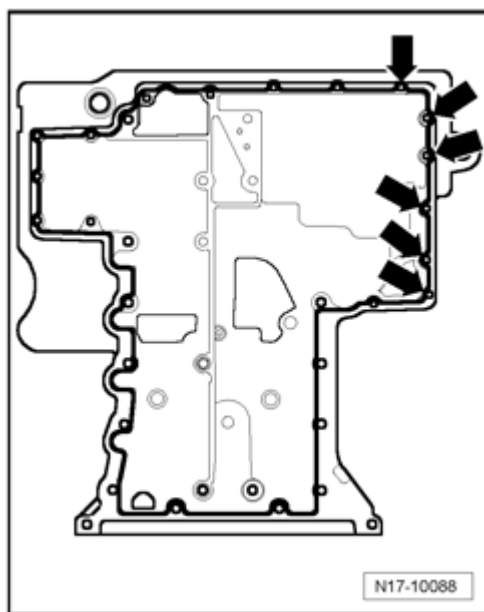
Applying Silicone Sealant To Clean Sealing Surfaces Of Oil Pan
